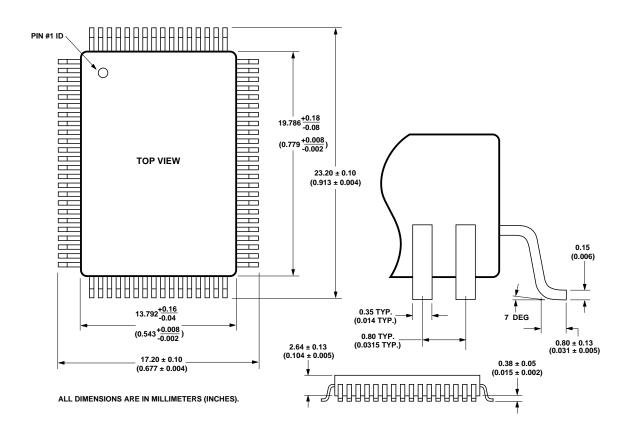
Mechanical Dimensions of HDMP-1012 and HDMP-1014.
